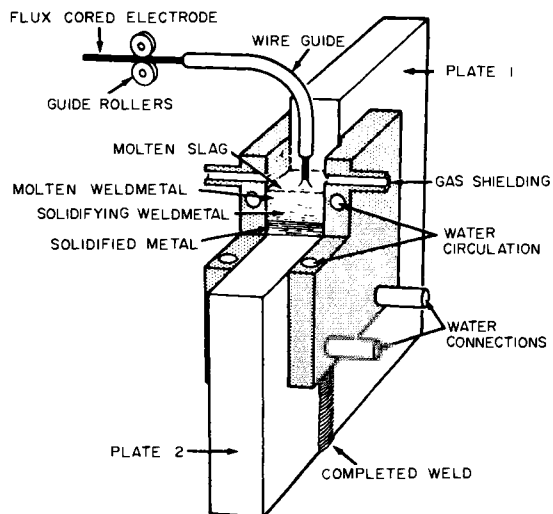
The electrogas welding process.⁽¹²⁵⁾
